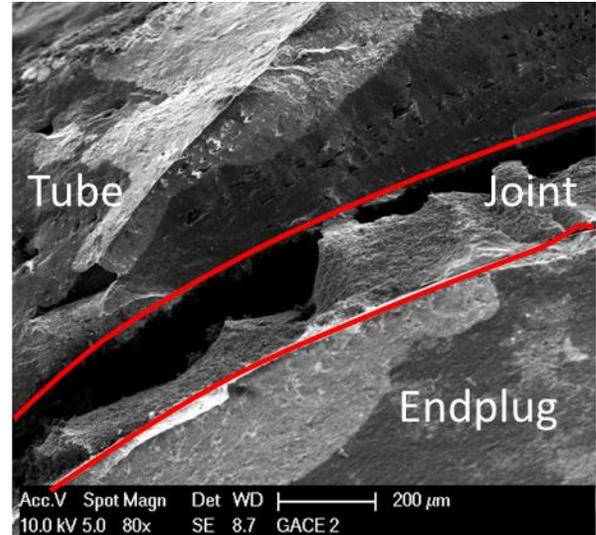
Cross sectional SEM view of GACE 2 endplug joint showing voids
